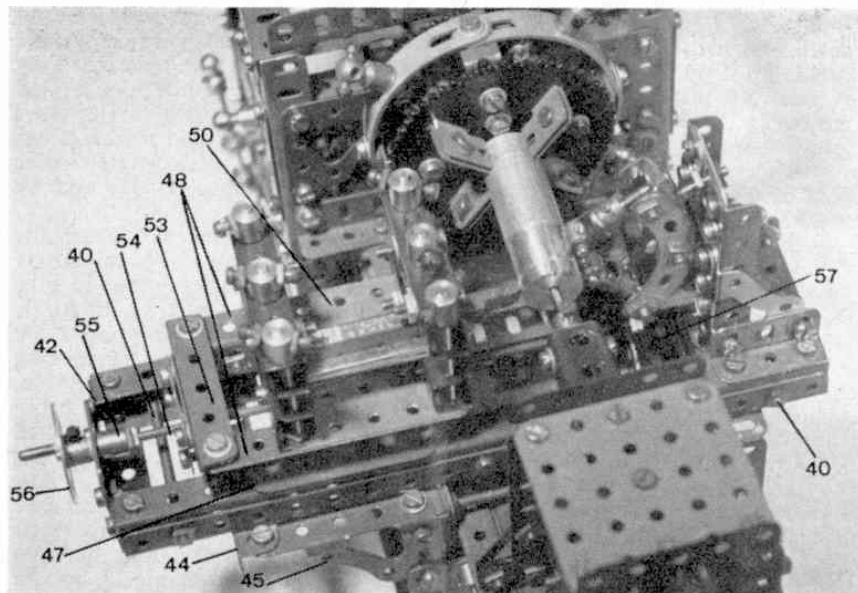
A close-up view of the cross slide with the Lathe set up for operation.
